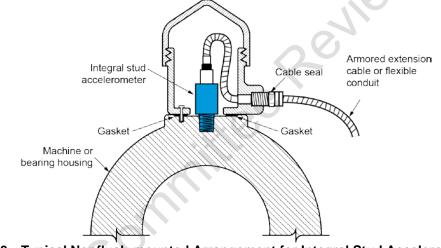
Typical Nonflush-mounted Arrangement for Integral Stud Accelerometer with Protection Housing
